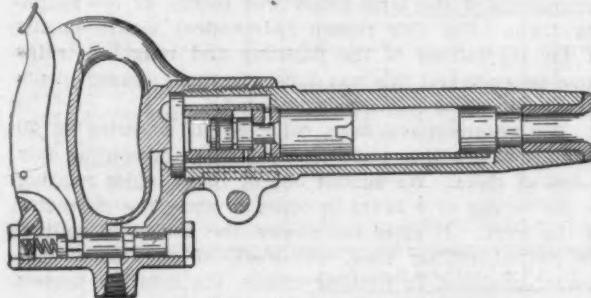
Sectional View of the Helwig Chipping Hammer.
